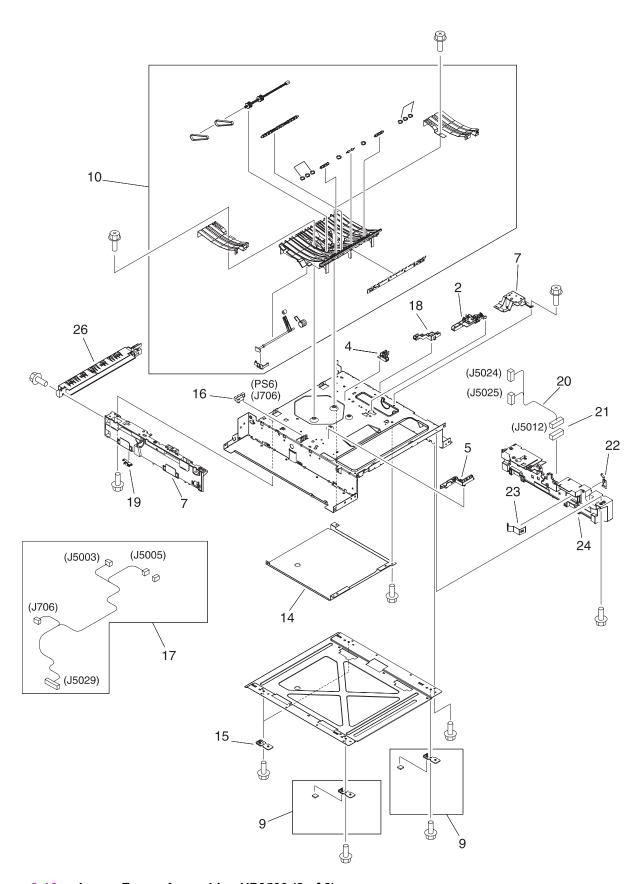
Lower Frame Assembly - HP3500 (2 of 2)
